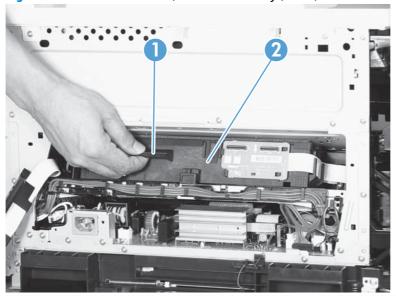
Remove the laser/scanner assembly (3 of 4)
